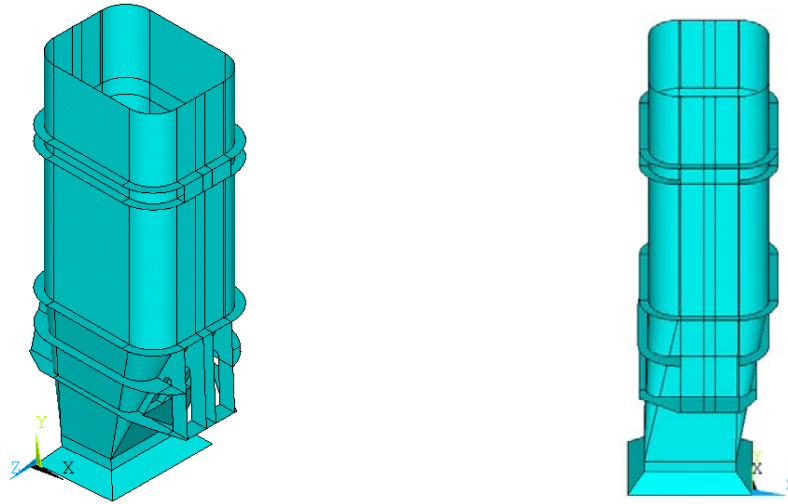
Addition of an horizontal reinforcement ring on the current geometry of exhaust system A
